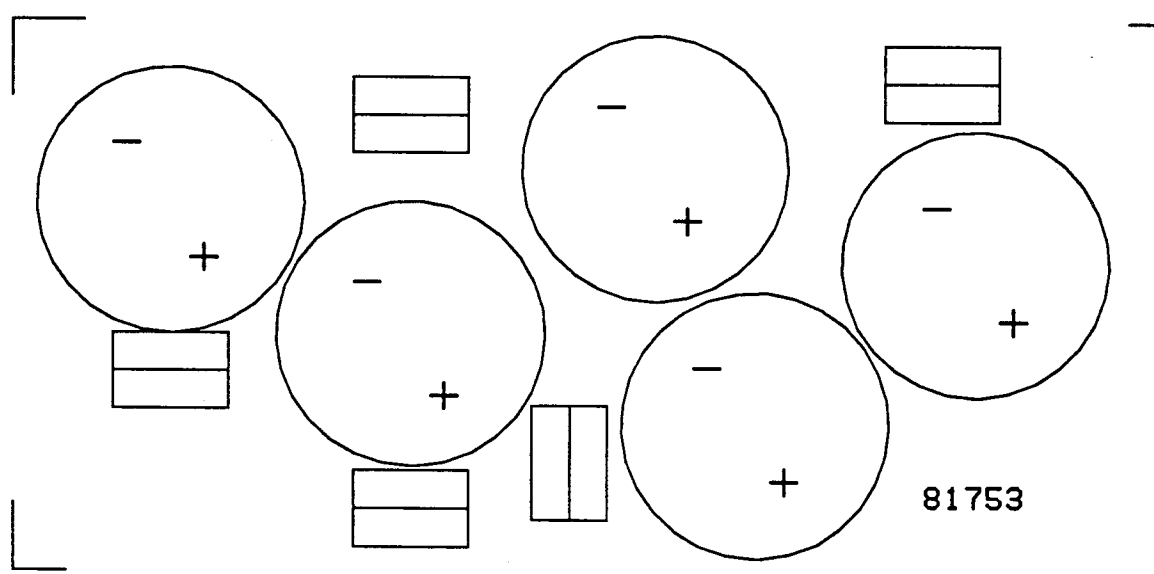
12 HV FILTER BOARD COMPONENT LAYOUT (81753)
